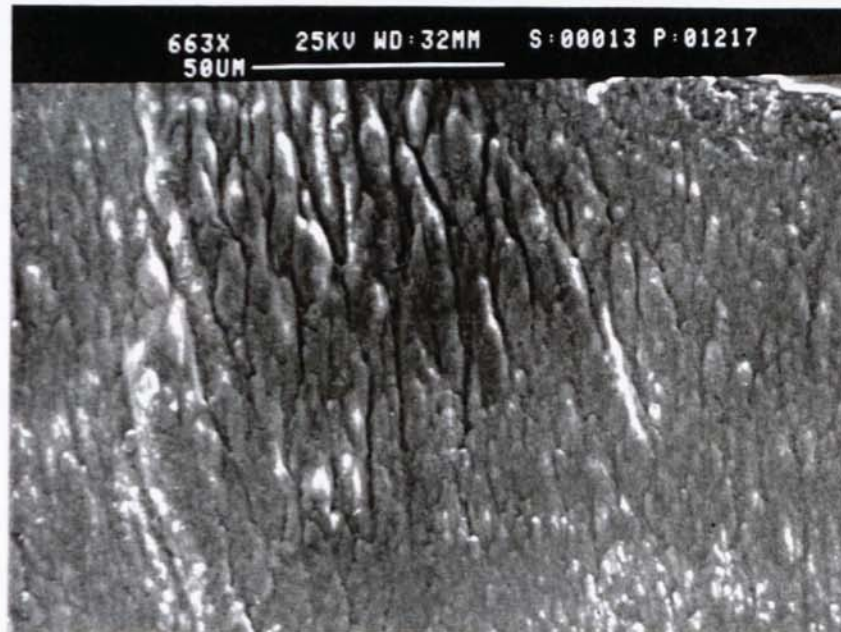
M2 HSS, cutting speed 20 m/min, rake angle 6°, flank angle 10°, and feed rate 0.15 mm/rev.
